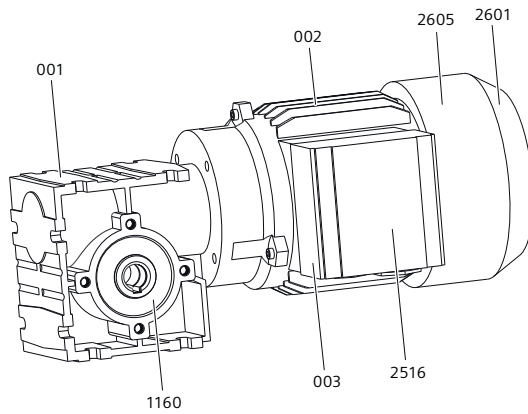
Worm geared motor S, frame sizes 09 - 29
